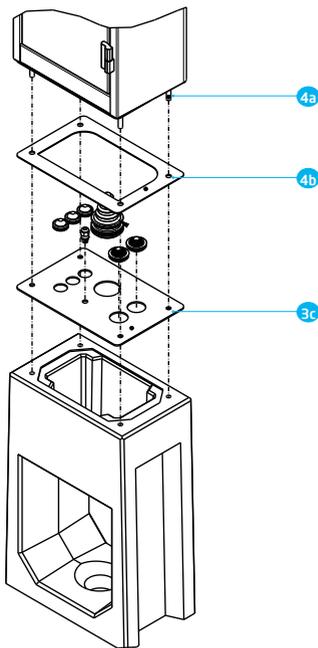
Concrete base and installation steps (3c, 4a, 4b)
